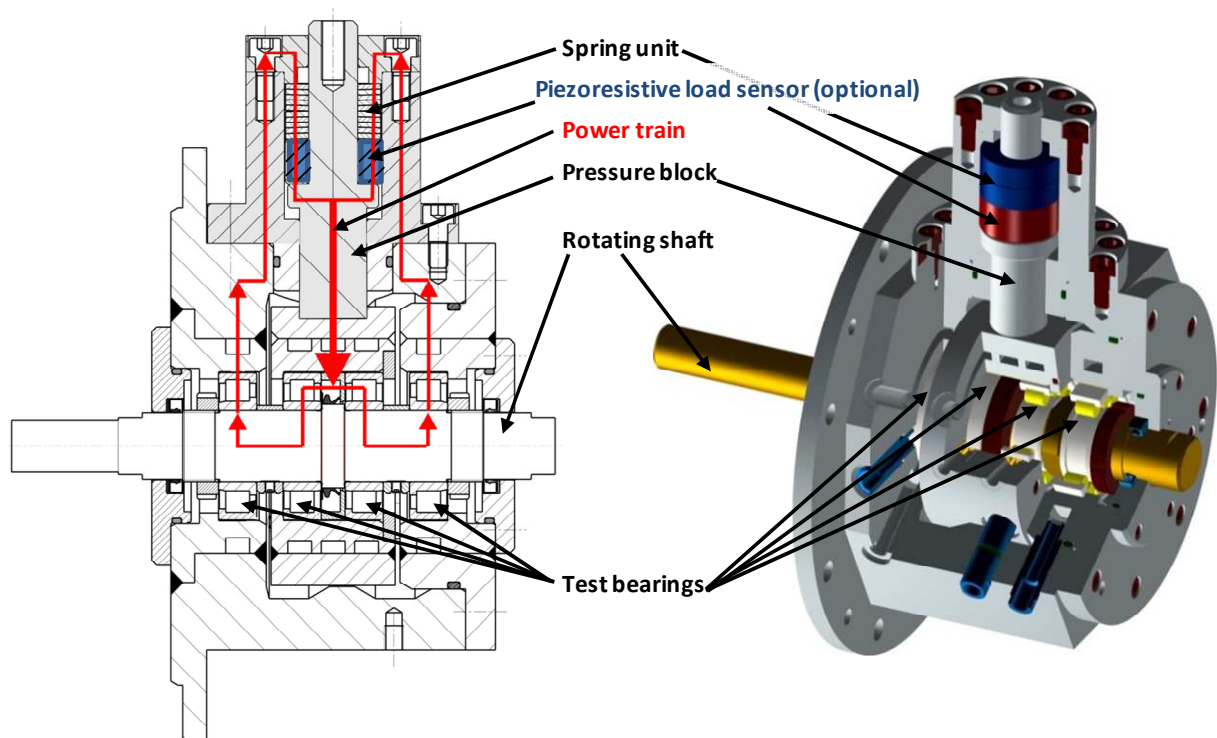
Test head of four cylinder roller bearing test rig ($d_{\text{shaft}} = 30 \text{ mm}$).
